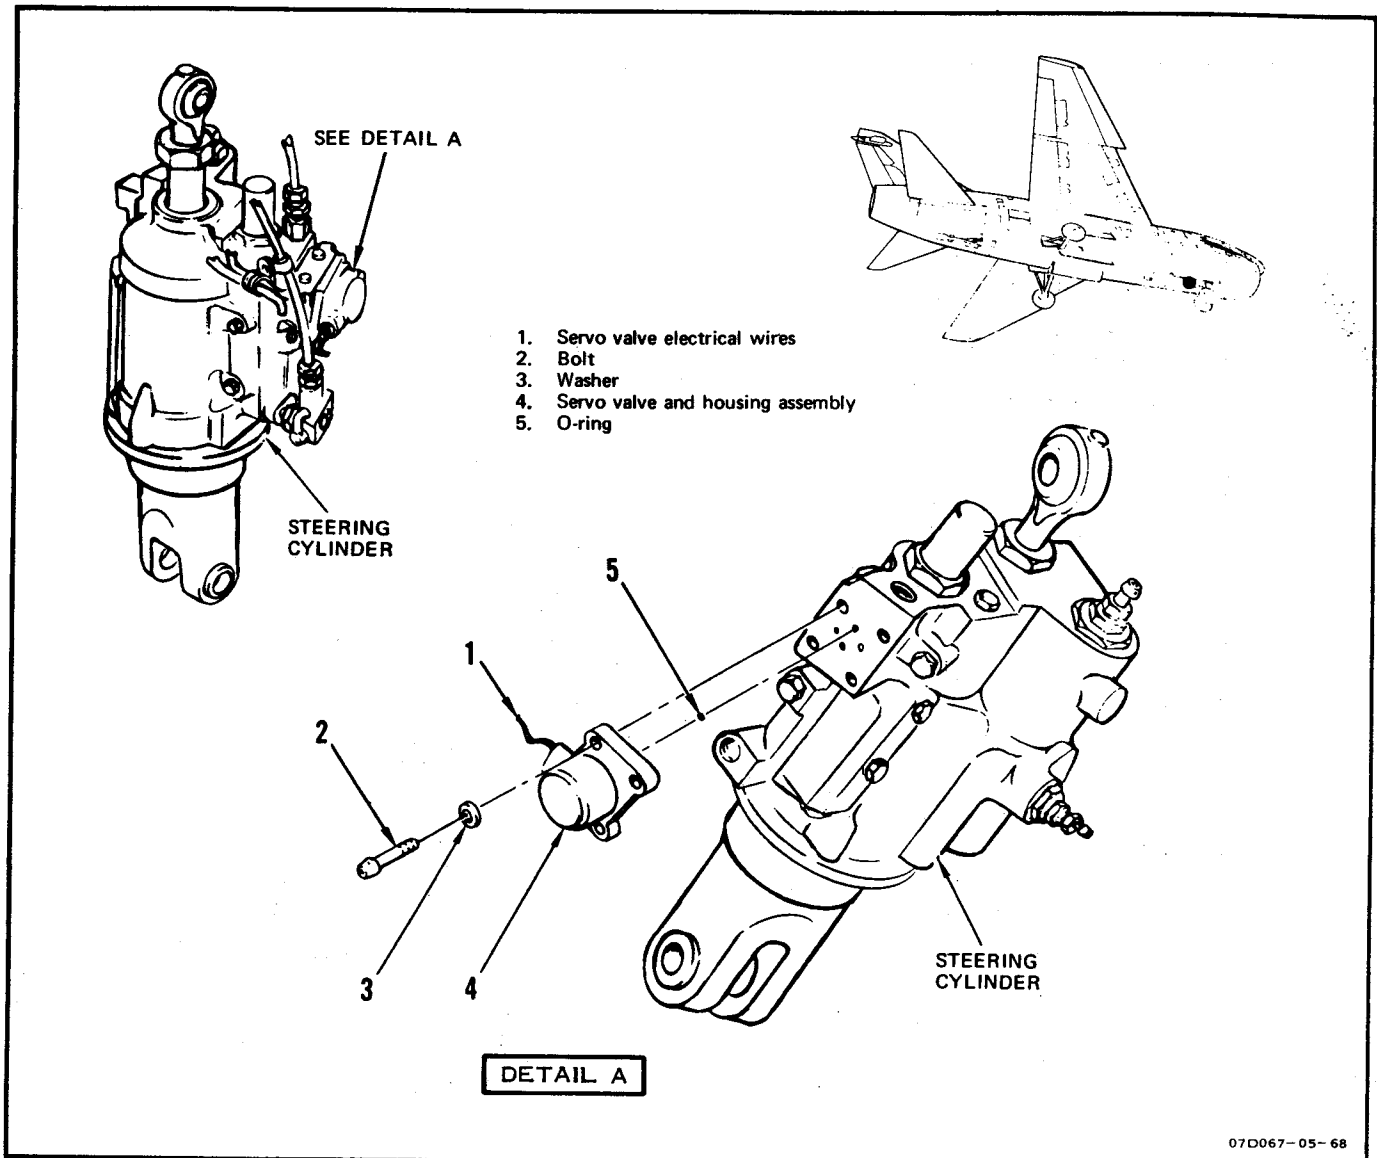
Nose Gear Steering Servo Valve Removal and Installation
